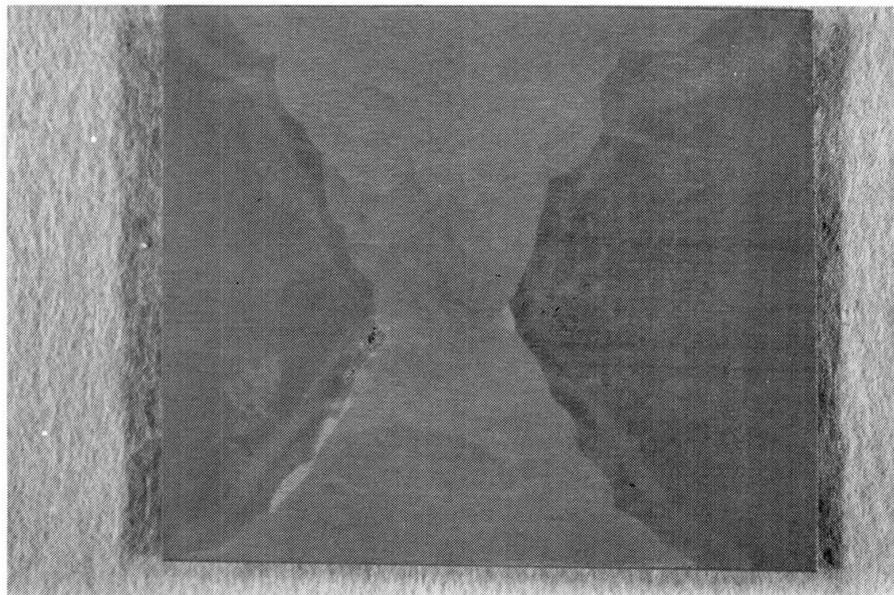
Cross Section of Weld at Embedded Defect
